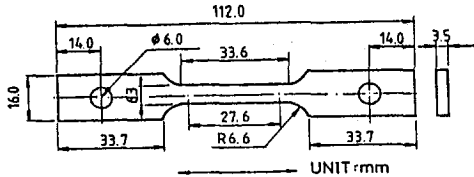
Geometry of pin-load tensile specimen for stress corrosion cracking tests
